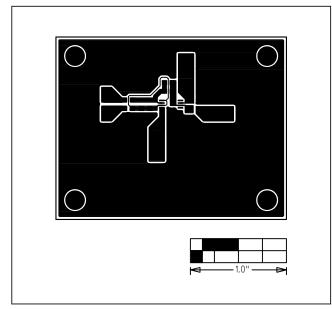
MAX9945 EV Kit PCB Layout—Component Side
